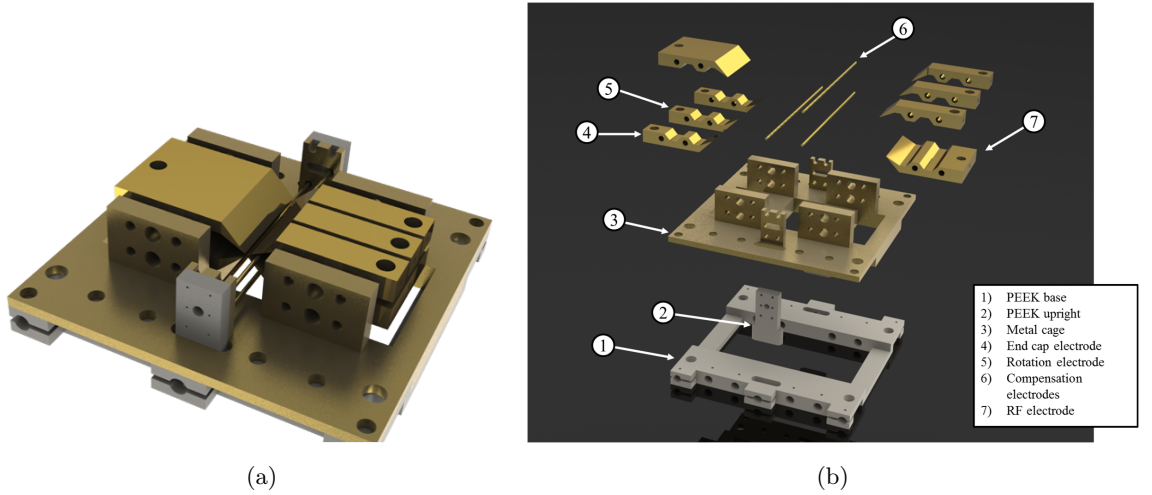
a) Solidworks drawing of the assembled blade trap. b) Exploded view of the blade trap.
